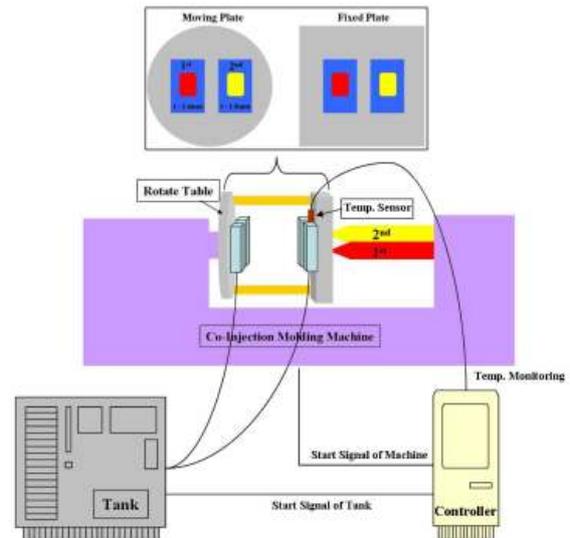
Rapid mold heating & cooling system for co-injection molding
